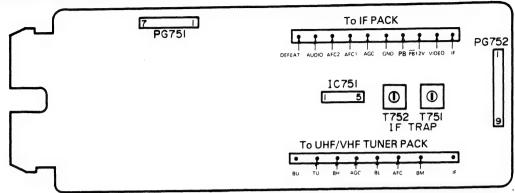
Tuner/IF P.C. Board (Parts Side)
